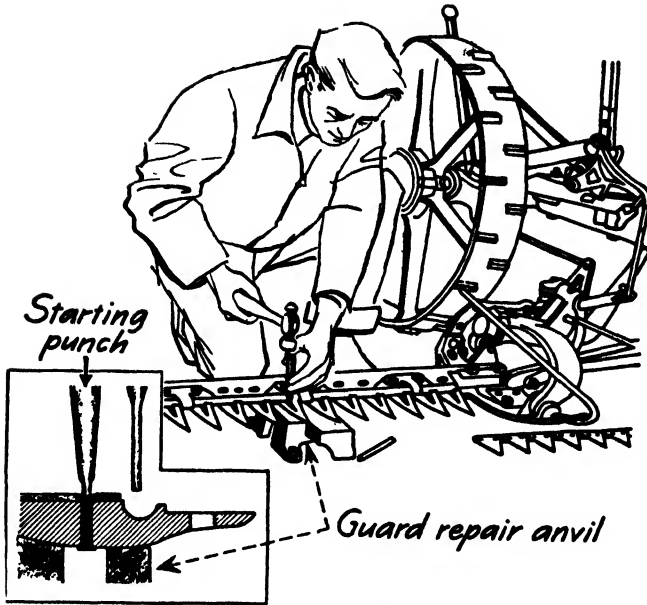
Worn or broken guard plates may be removed without taking the guards off the cutter bar. Start to remove the rivets with a stout starting punch and then finish with a slim punch.
